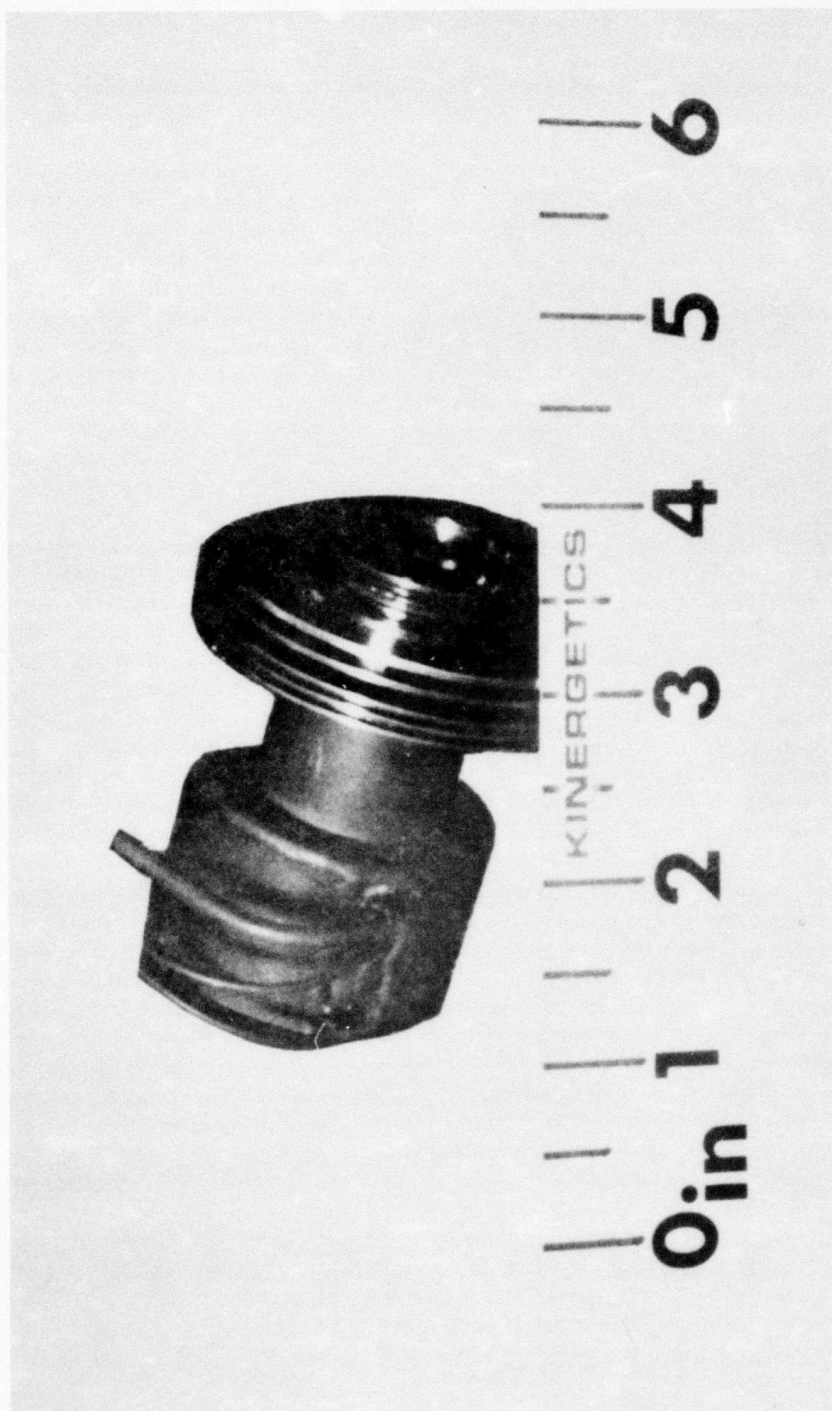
Successfully Brazed Hot Cylinder Assembly
